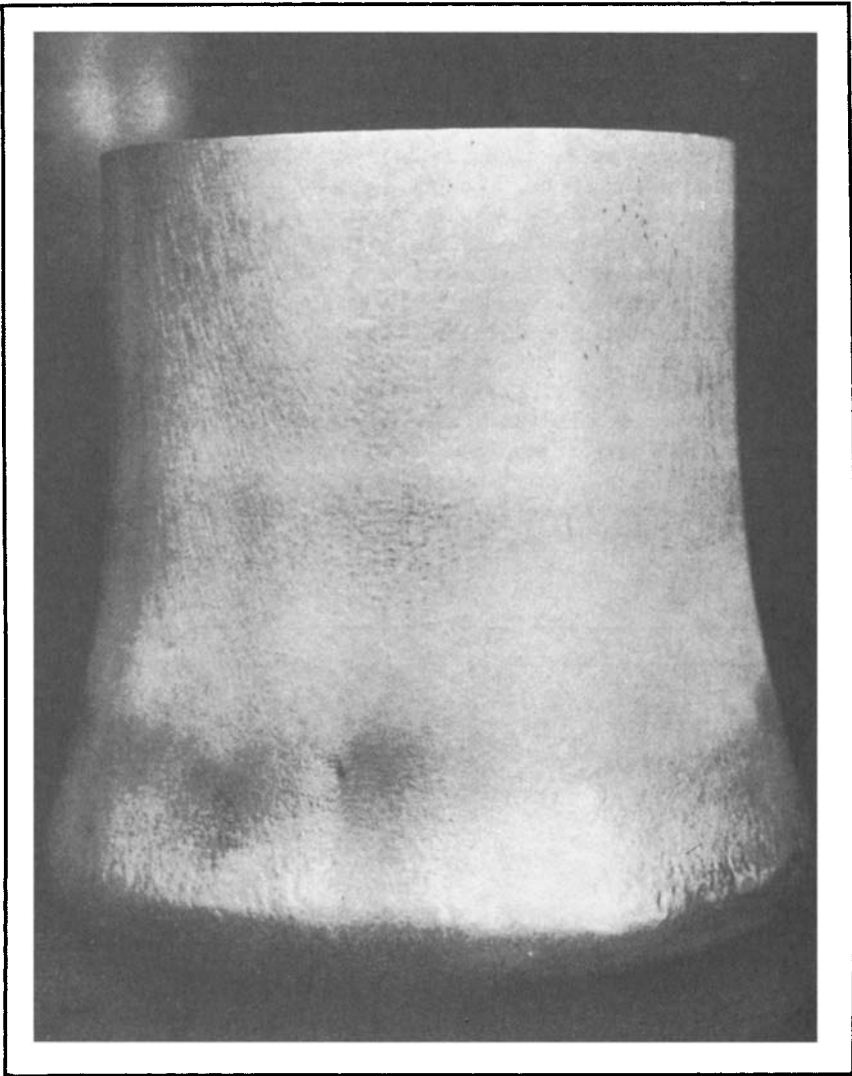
Orange peel surface on a drawn and expanded aluminum alloy shell (129% reduction). (Courtesy of J.T. Hobbs of the Aluminum Company of America)
